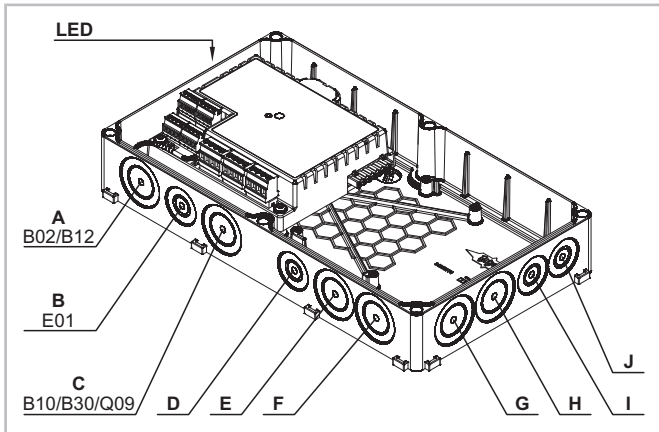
Assignment of the cable bushings into module housing for compressors of housing size 5 and 6, smaller housing sizes similar.
